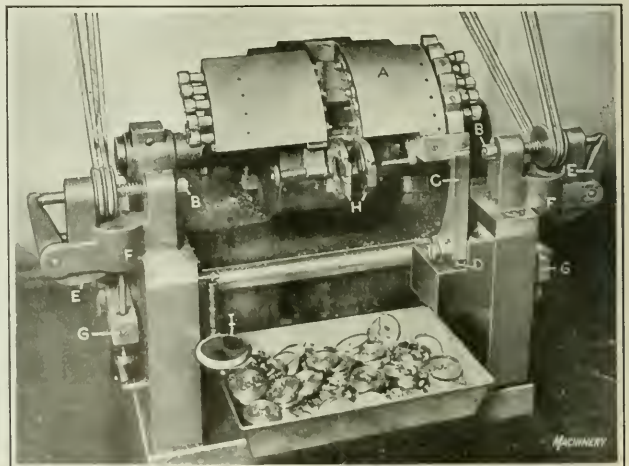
Multiple Opposed-spindle Reboring or Uprighting Machine
